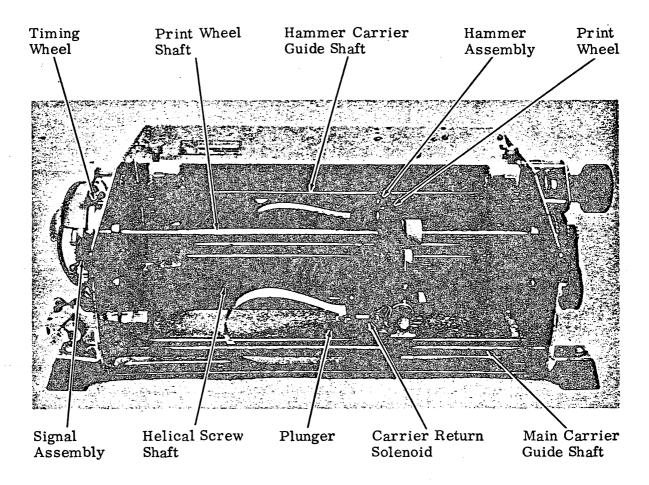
Print Wheel Shaft/Helical Screw Shaft Drive
